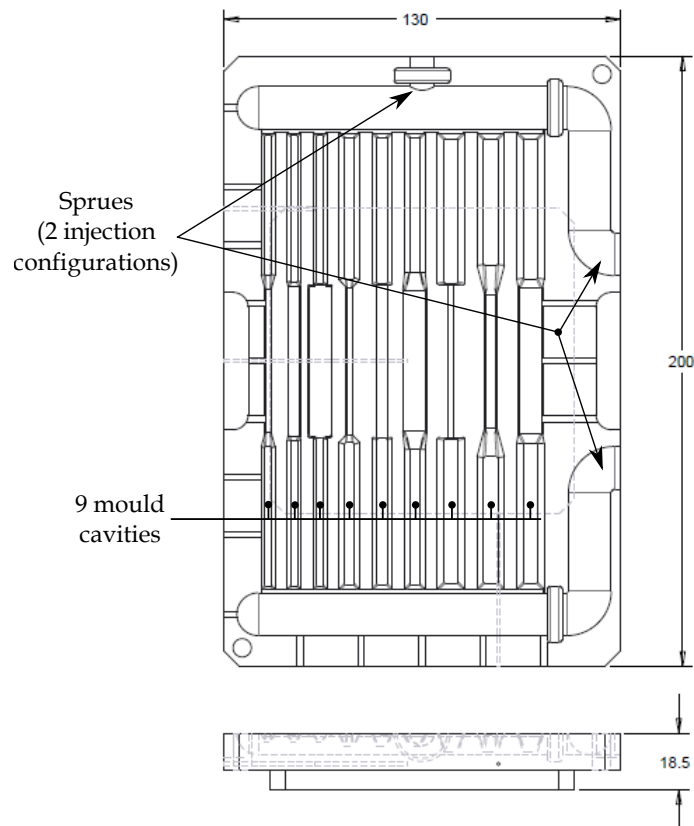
Regional controlled mould (industrial): main dimensions of mould and Peltier modules.
